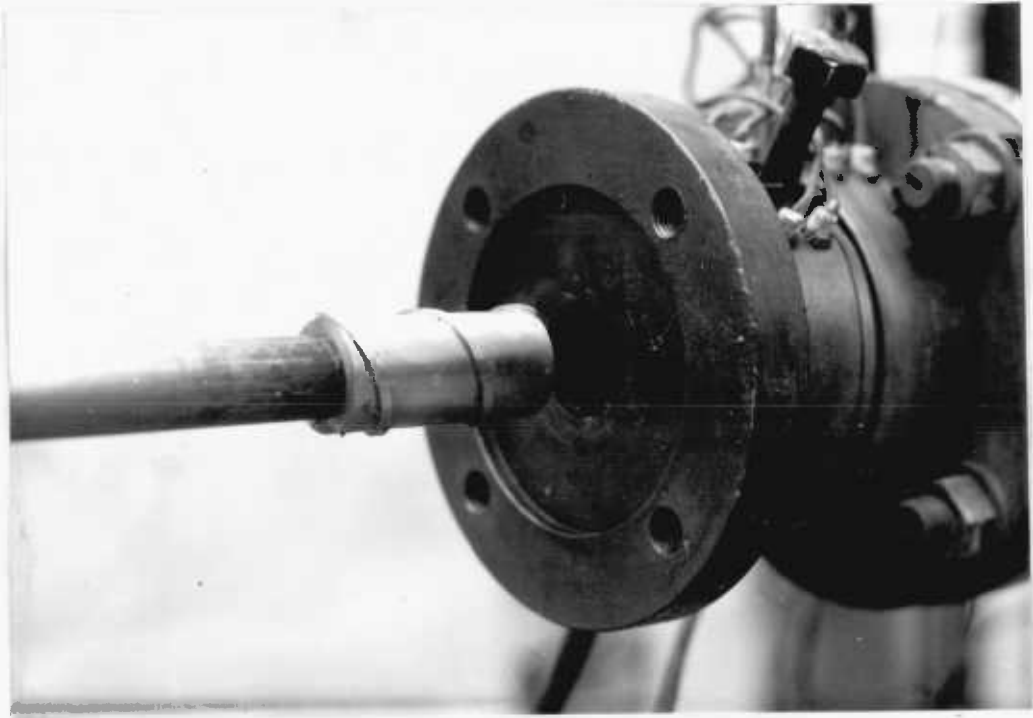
SCREW SECTION AND OPEN WORKING SECTION BARREL
